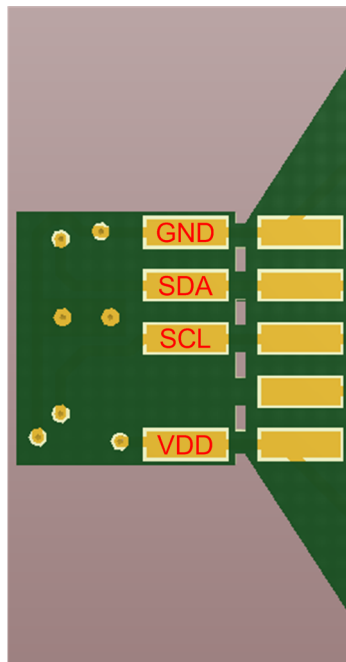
HDC1080EVM Pads for I2C and Supply of the Smaller Sensor Section
